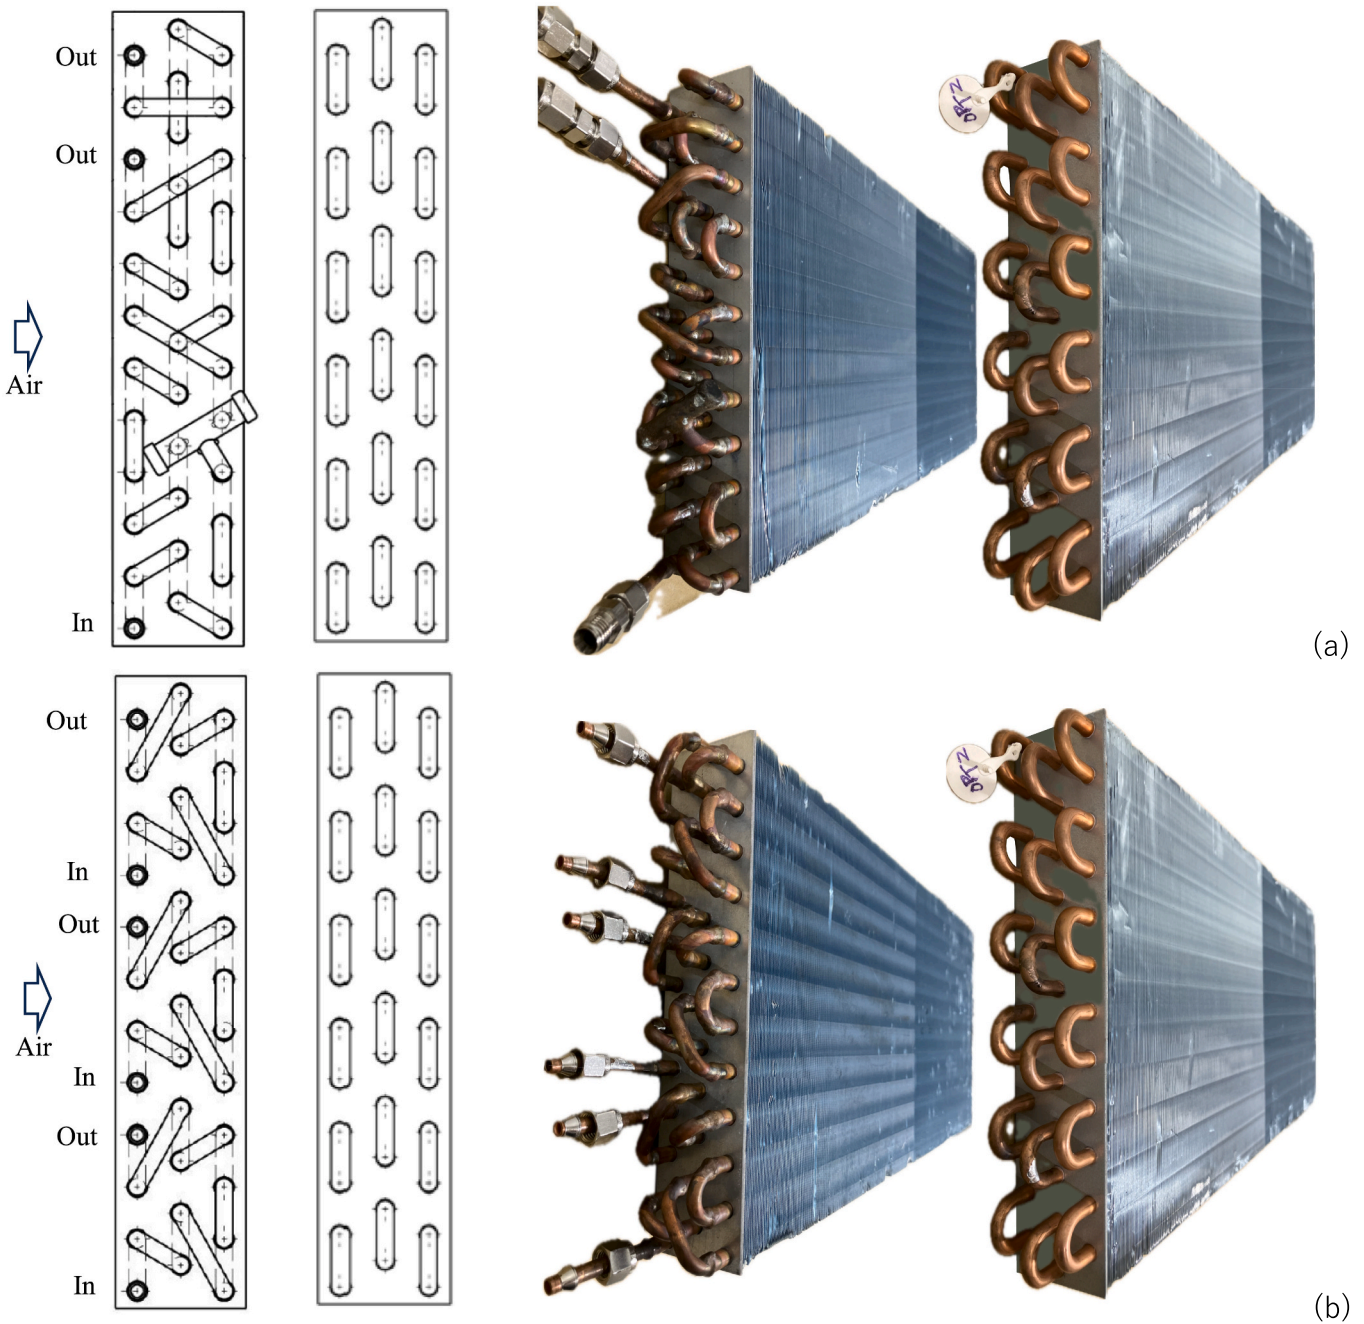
Schematics of the side view and photographs of the manufactured Opt.#3 kW (a) and Opt.#4 kW (b) heat exchangers.
